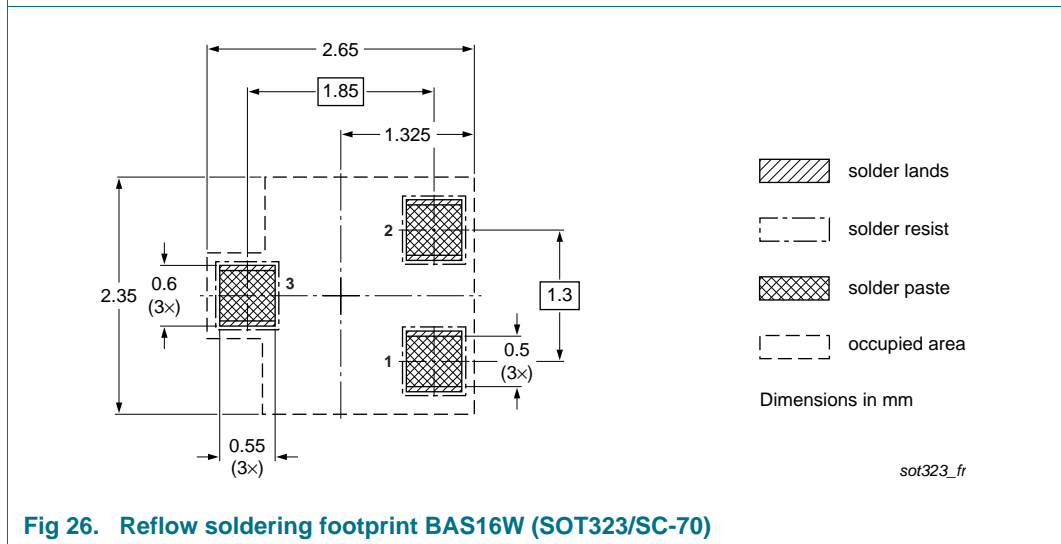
Reflow soldering footprint BAS16W (SOT323/SC-70)
